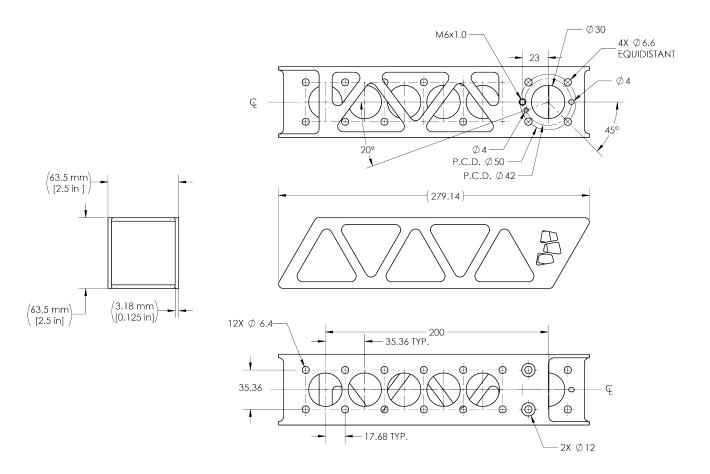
Technical Dimensions of the 200 mm Hollow Offset Link
